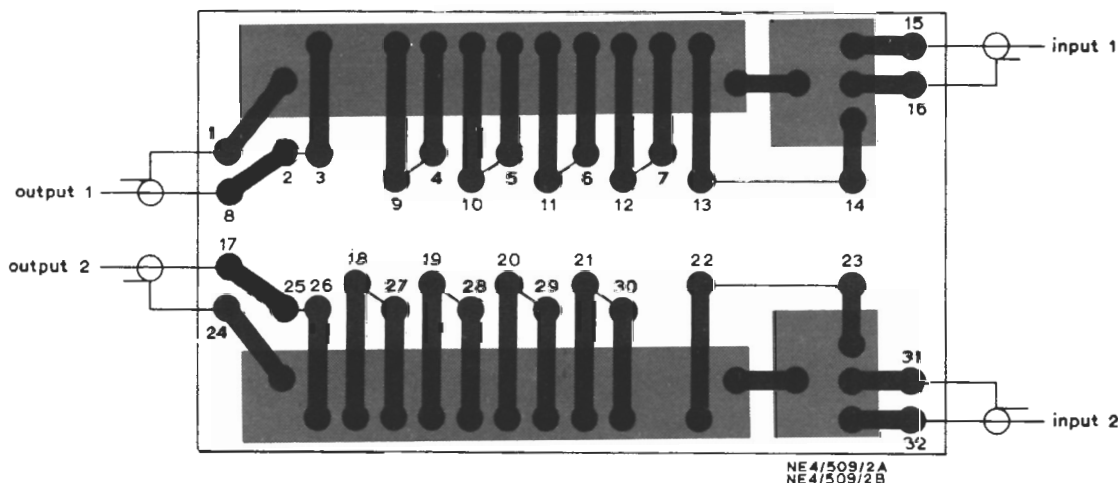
NE4/509 Printed Wiring Board viewed from the component side
